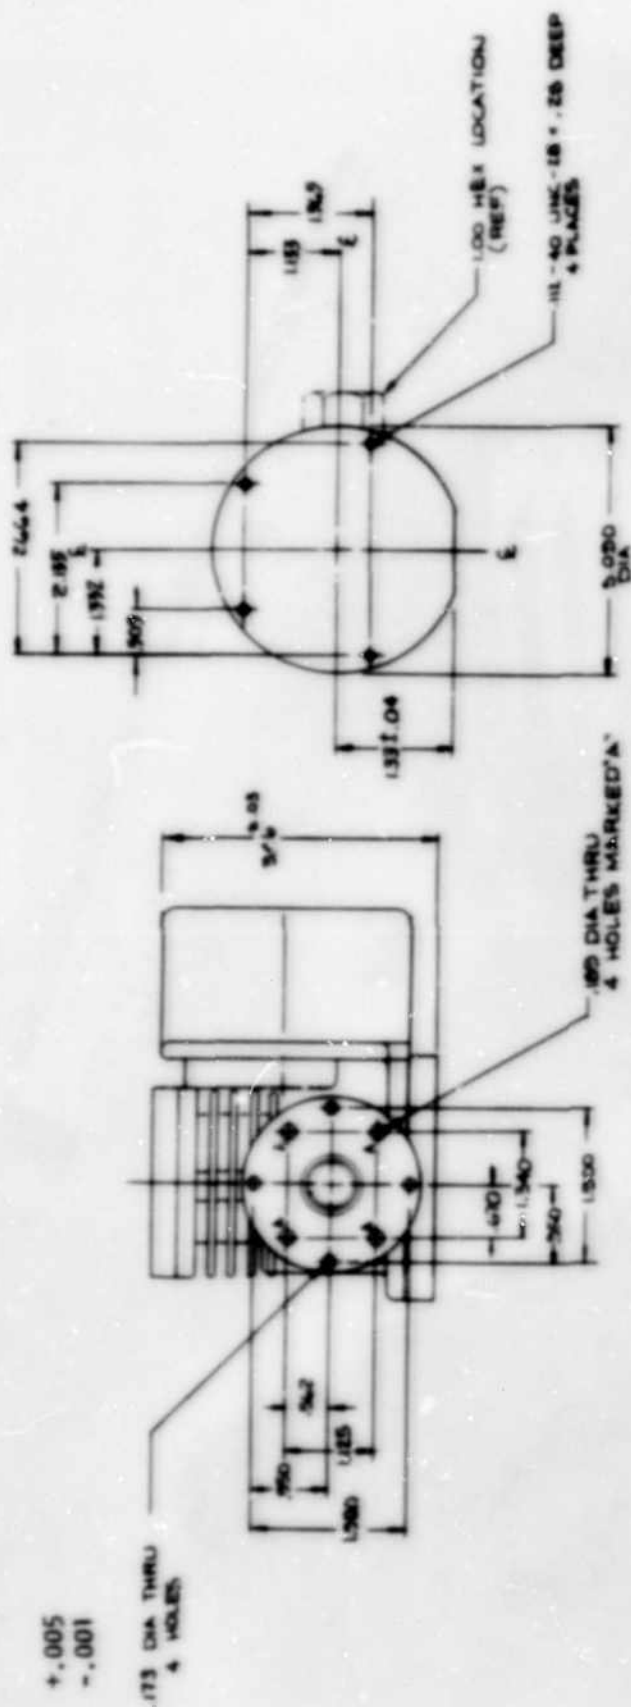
Modular Cooler Outline Drawing (Sheet 2 of 2)
